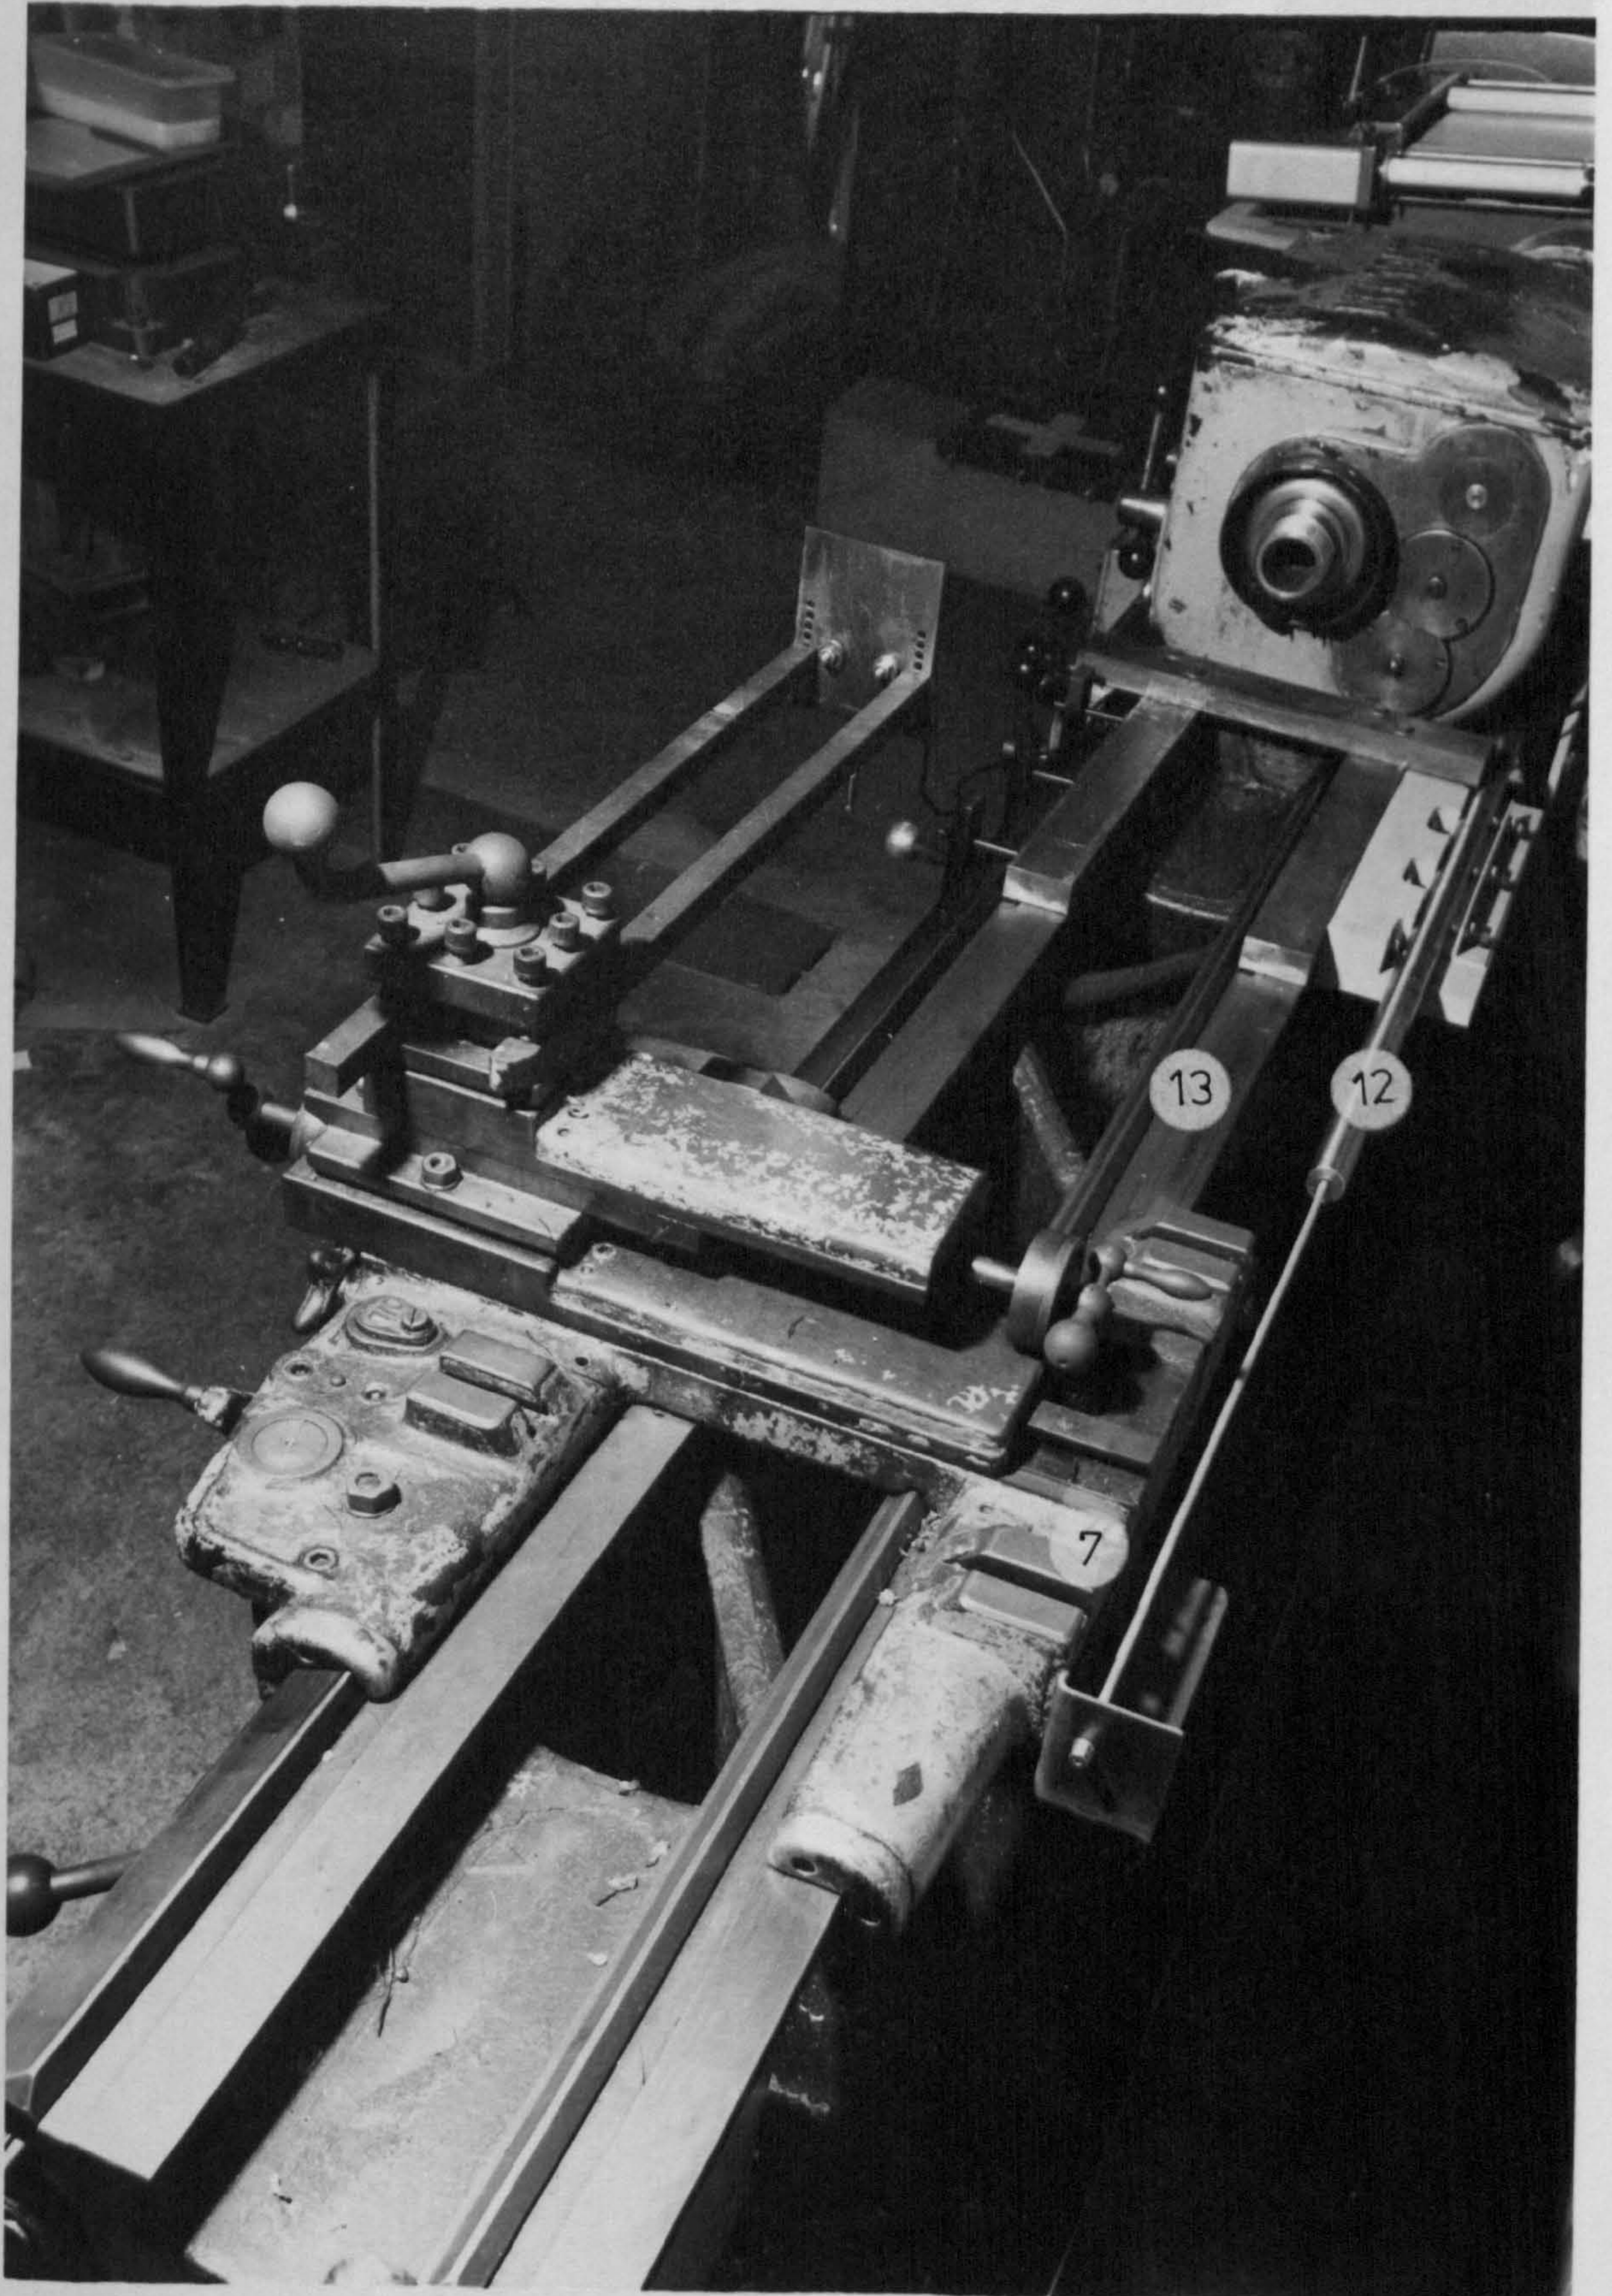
GENERAL VIEW OF LATHE BED — SHOWING LONG STROKE
